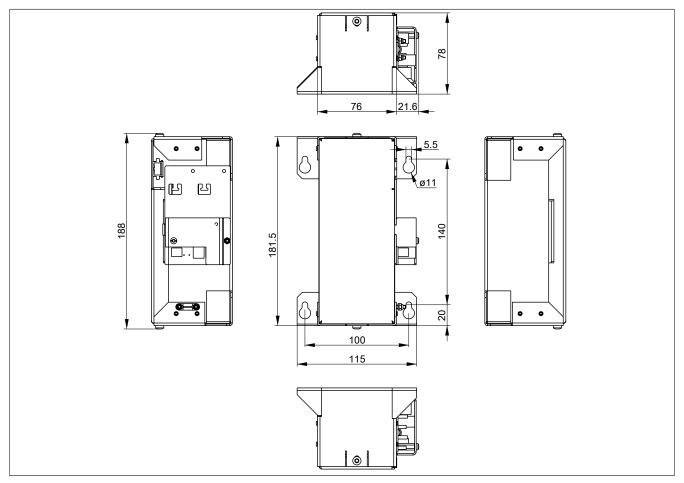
9A0100.14 ≥ Rev. F0 - Dimensions
